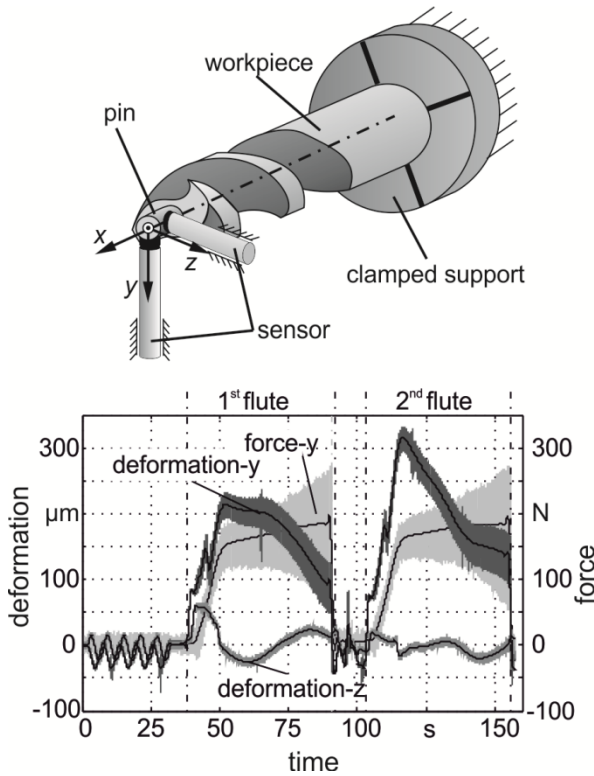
Measurement of workpiece deformation, process forces and out-of-roundness of the workpiece tip
